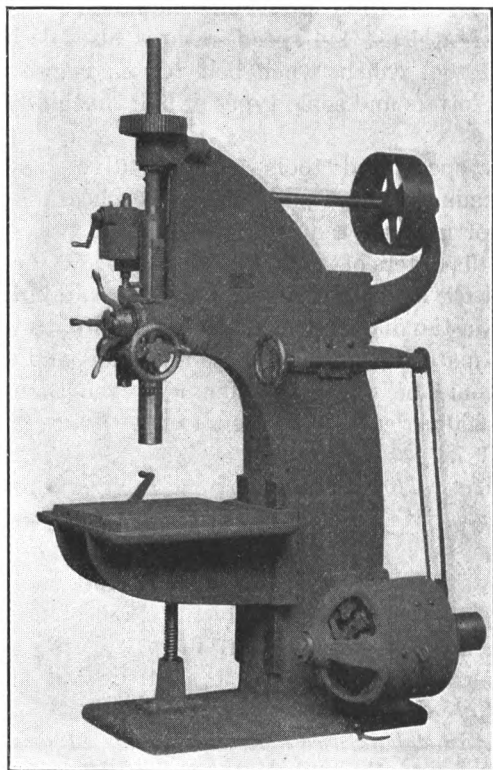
DRILL PRESS DRIVEN BY AN ARMATURE-SHIFTING MOTOR
